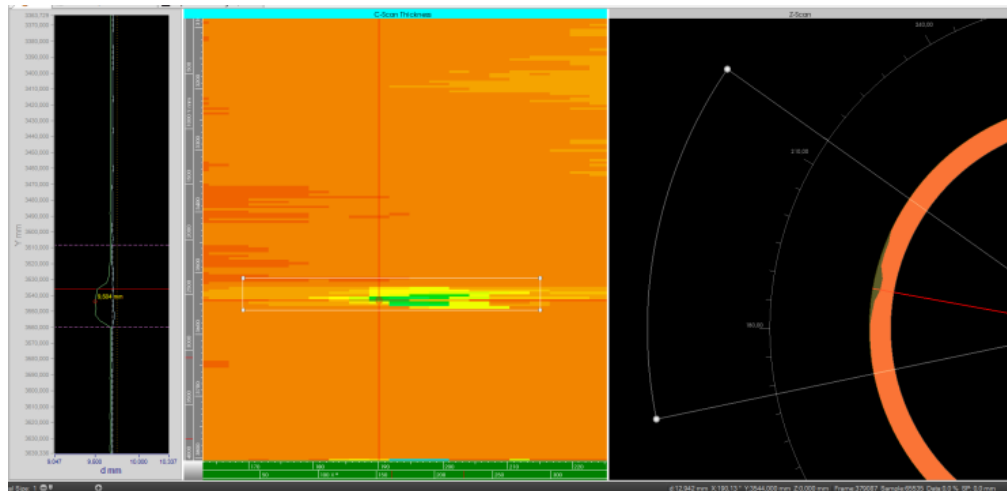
INSPECTVIEW TOOL – FFT wear measure
